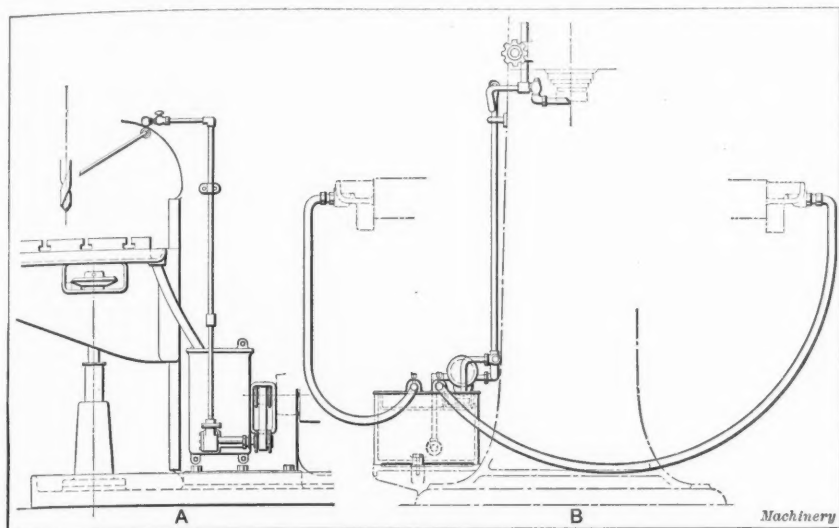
A, Lubricating System for Drilling Machine; B, Supply and Return System of Vertical Milling Machine
